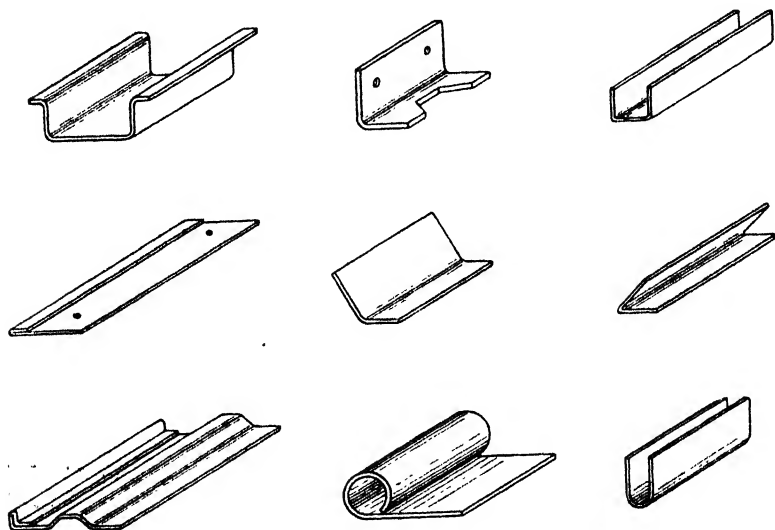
Typical examples of bends, folds, brakes, curls, and U's, which are the result of forming operation when produced on a press or brake.
